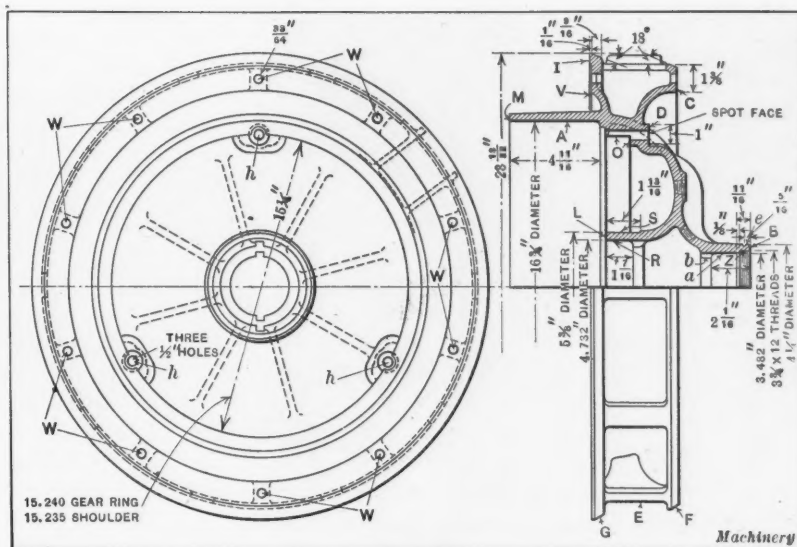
Side and Cross-sectional Views of a Steel Disk Wheel for the Nash "Quad" Motor Truck
